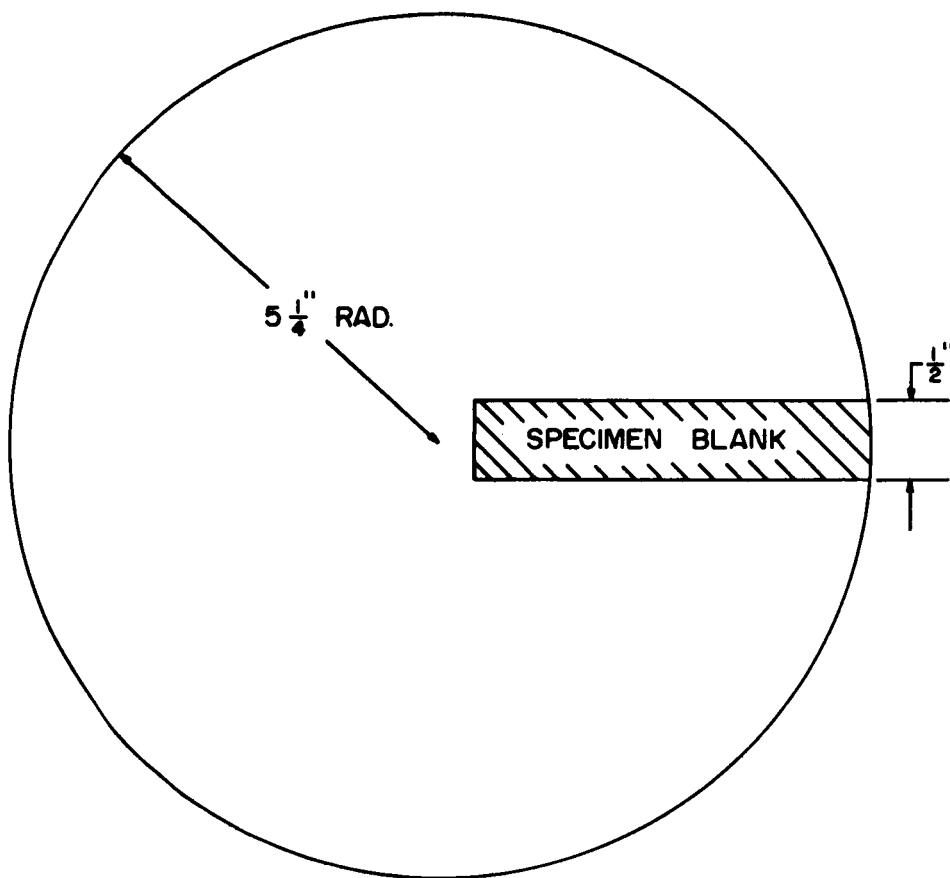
LOCATION OF SPECIMEN ON FORGED DISC.
